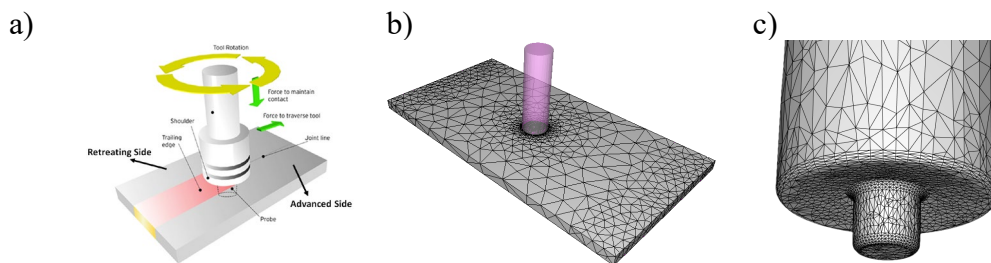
a) FSW scheme process, b) simulated plate and tool, c) tool design.
